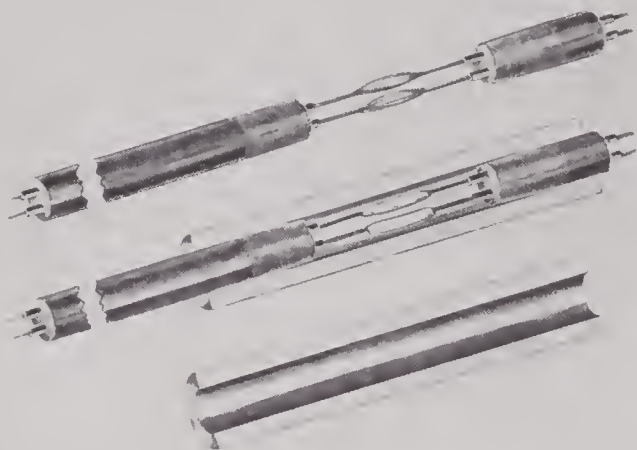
Stages in the preparation of a cable to make it liquid-tight by molding uncured rubber about stranded conductors. Above: Bare strands exposed and rubber sheath roughened. Below: Strands soldered together and cable placed in semicylindrical mold ready for addition of uncured rubber stock.
